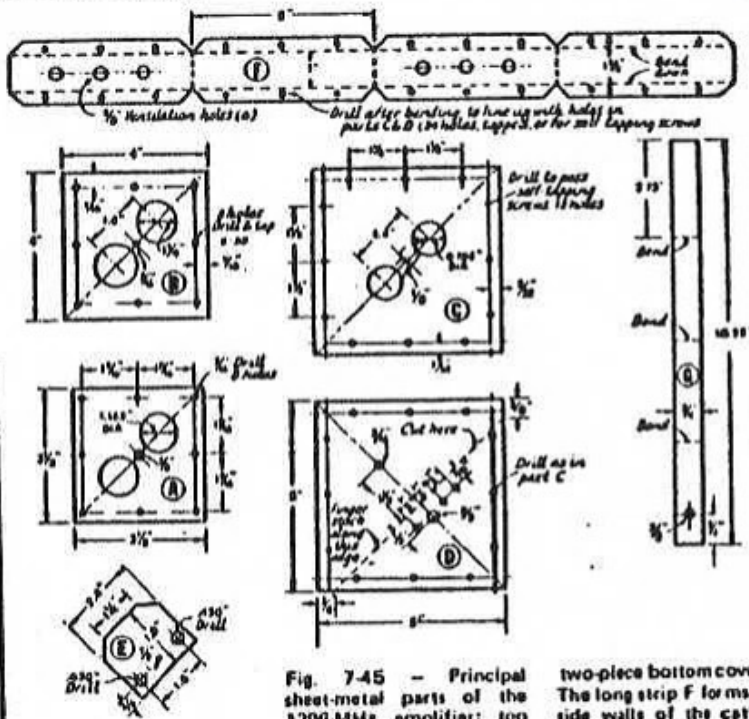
Principal sheet-metal parts of the 1296-MHz amplifier: top plate of the bypass capacitor, A; its bottom plate and top cover of the plate cavity, B; top plate of the cathode assembly, C; and
